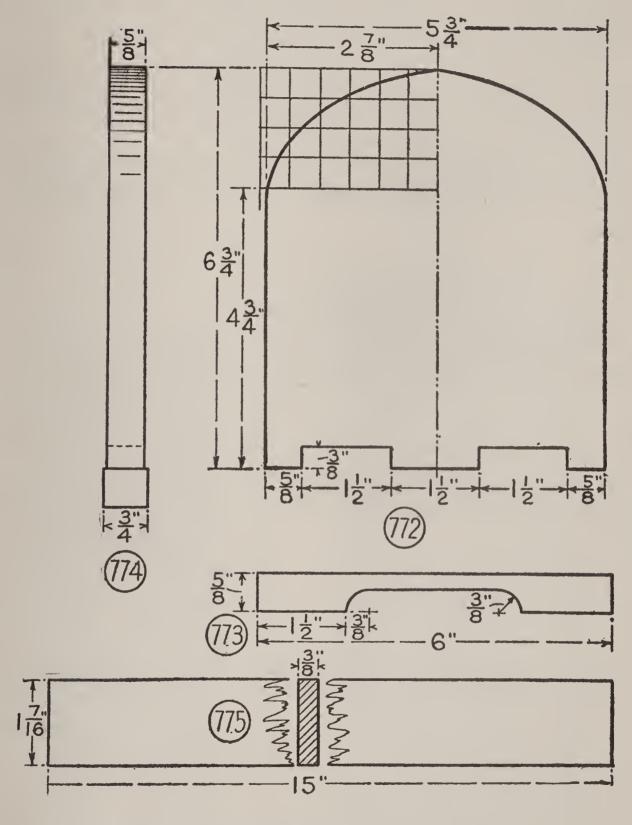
Book-Rack End. Fig. 773.—Base Block. Fig. 774.—Edge View of Completed Book-Rack End. Fig. 775.—Slide Strip.
